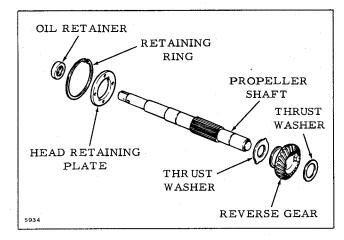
Removing Reverse Gears and Propeller Shaft
